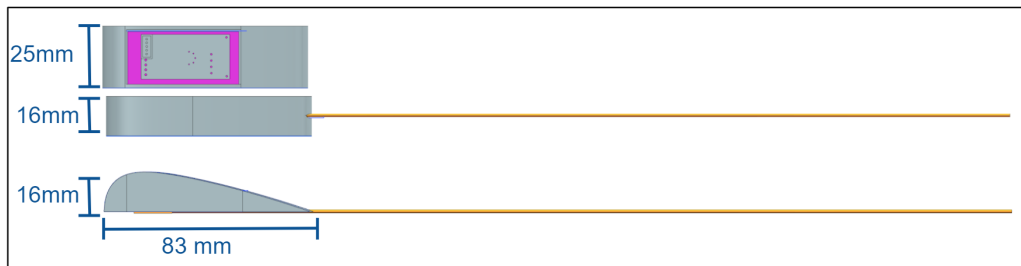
Top view (Top) and side view (Bottom) of the airfoil package design with sensor board shown on top of the battery (pink) and the antenna and radio (gold) in its own housing.
